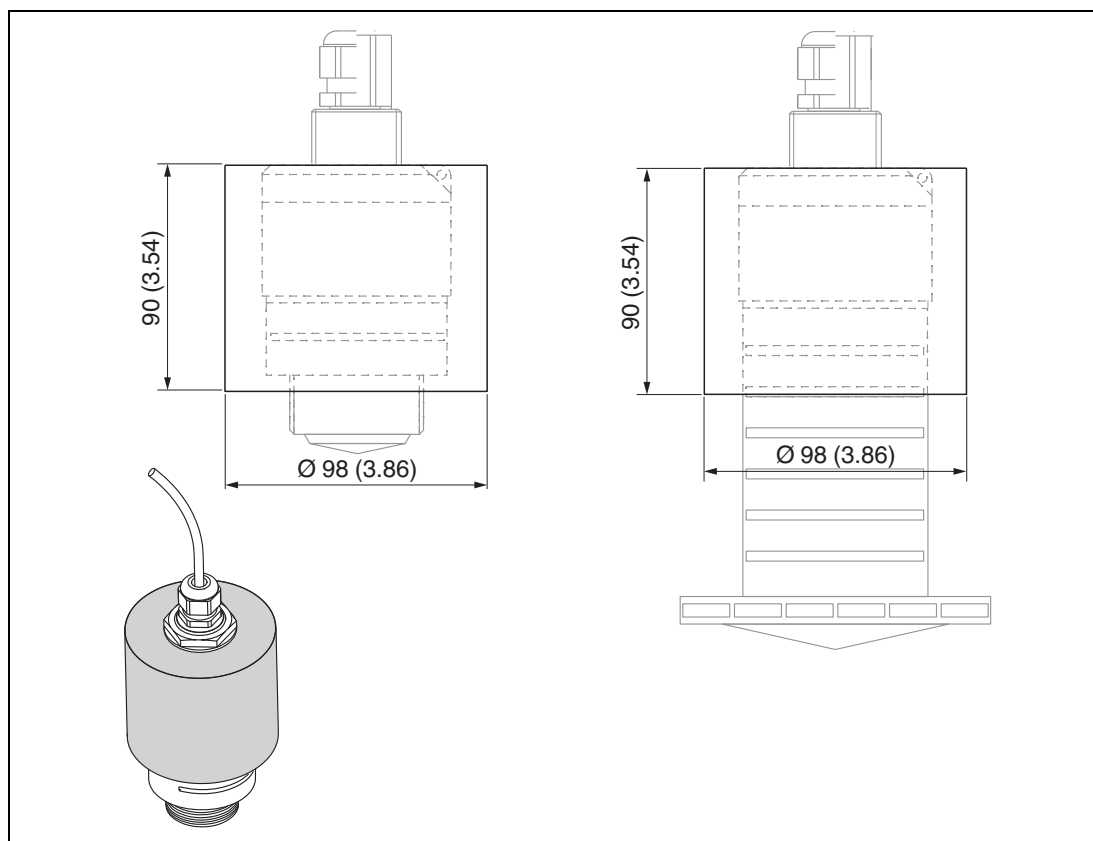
Dimensions of weather protection cover, engineering unit: mm (inch)
